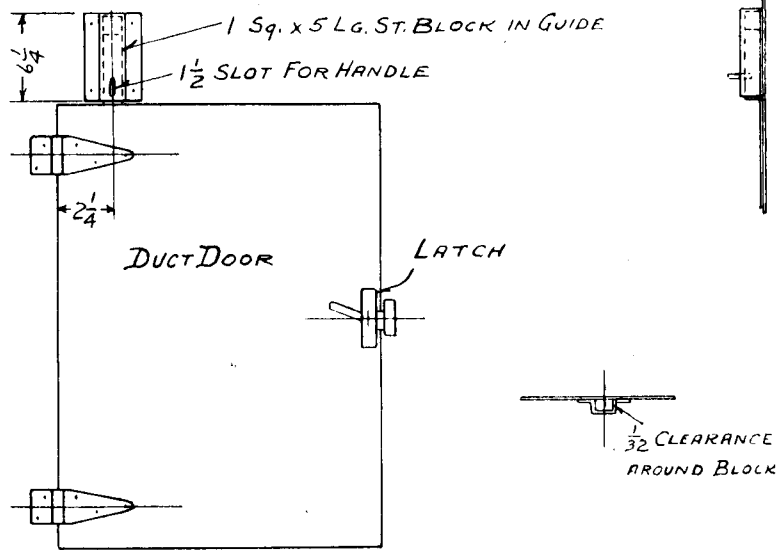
MECHANICAL INTERLOCK FOR DUCT DOOR
